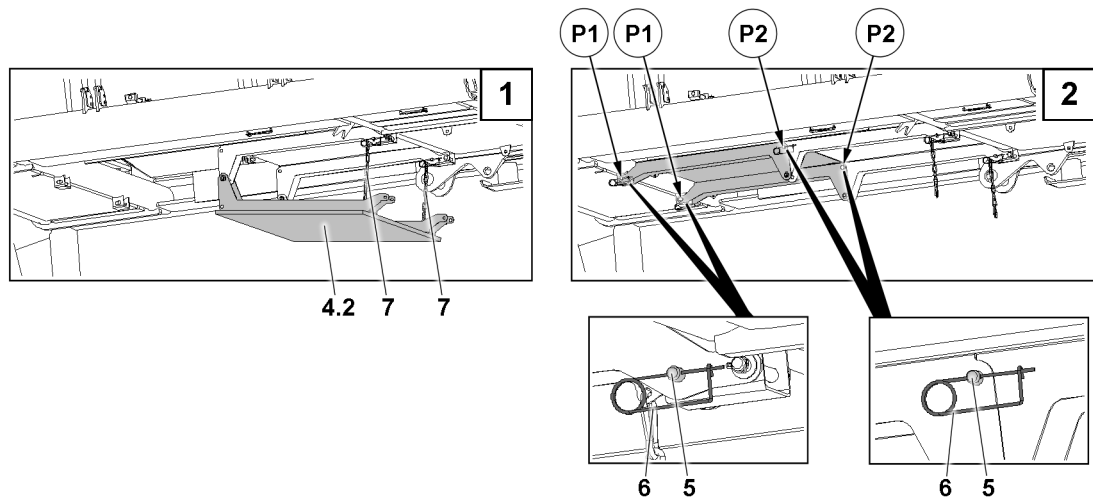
Assembling the assembly pedestal in the operating position — positioning the lower platform in the operating position
